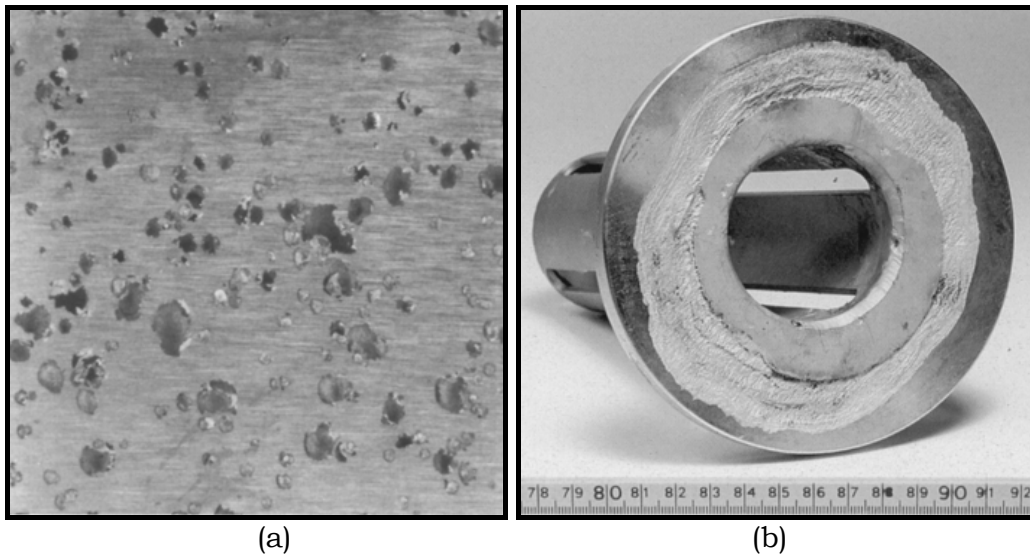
An example of (a) pitting corrosion on the surface of an austenitic stainless steel [43] and (b) crevice corrosion on the flange of an austenitic stainless steel
